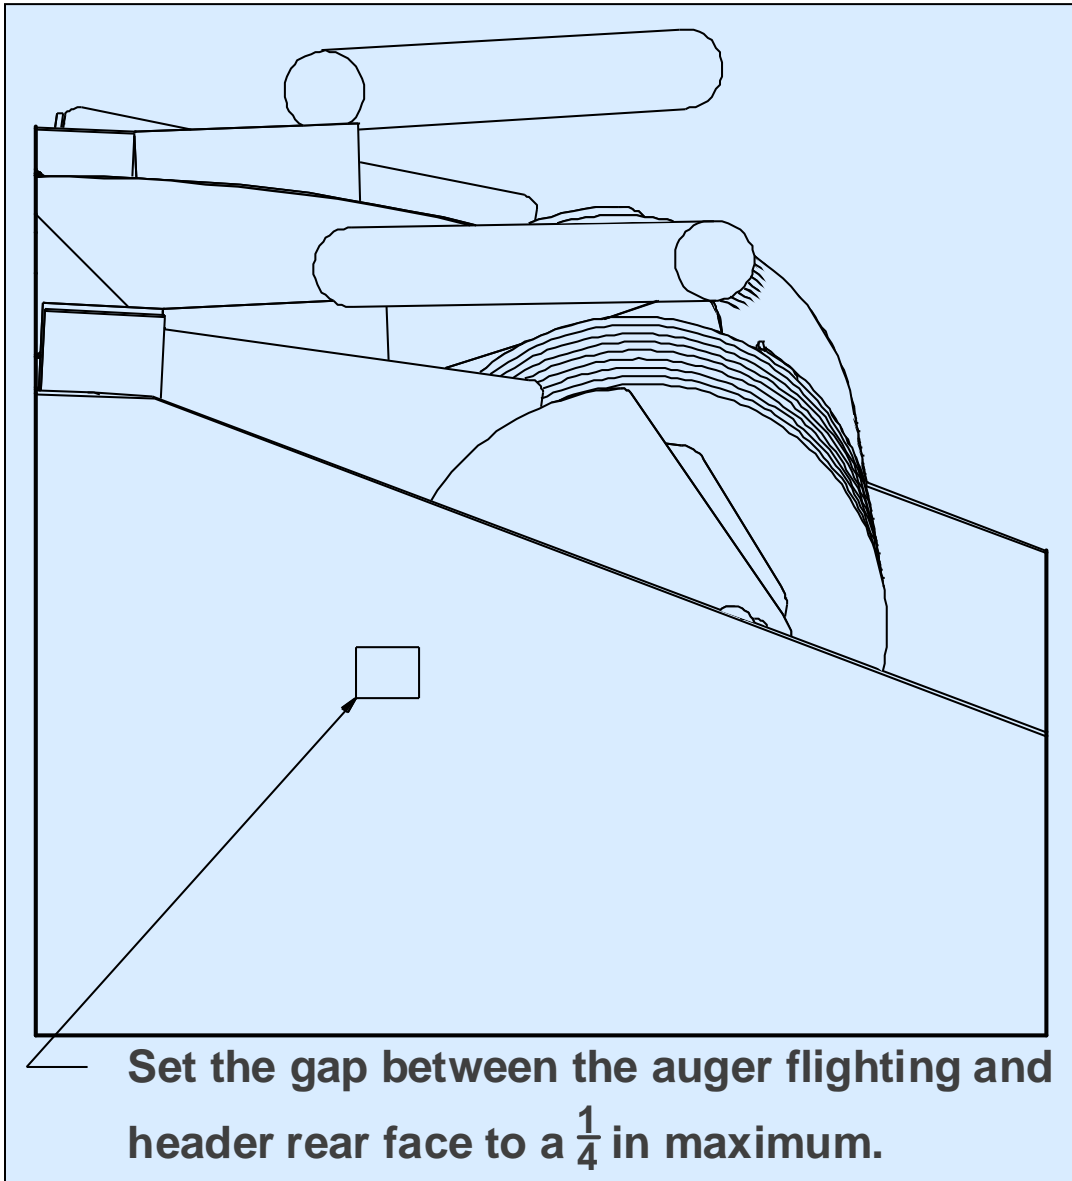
RED TEMPLATE (ASM #408246) IN PLACE AGAINST HEADER REAR FACE (END VIEW)
